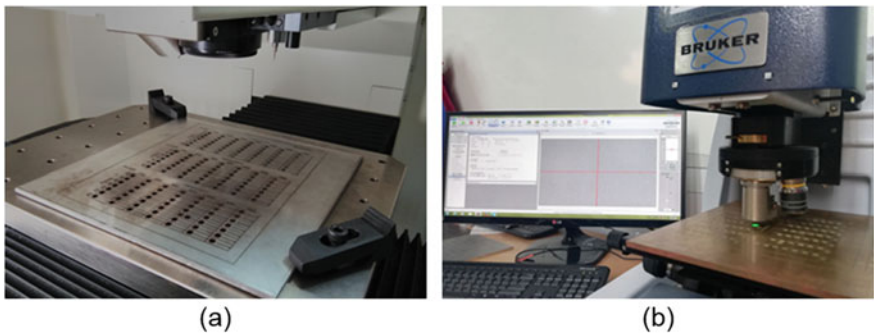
a square pockets engraved using LASERTEC40 laser machining center b square pocket measuring process using ContourGT-K 3D optical microscope-profilometer
